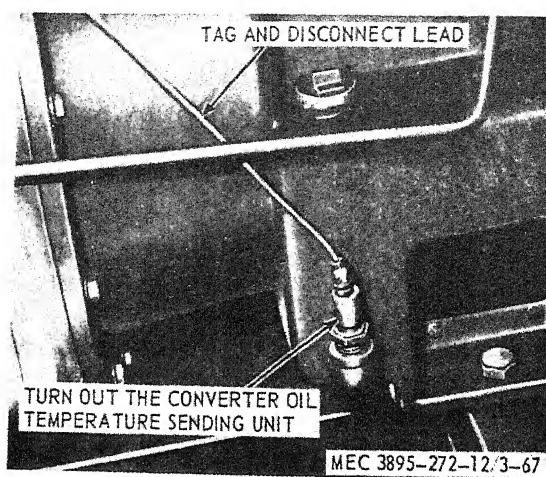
Torque converter oil temperature sending unit, removal and installation.
